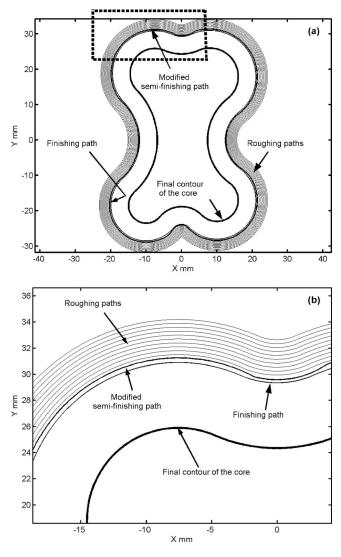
(a) Modified semi-finishing tool path generated by the proposed algorithm with optimized cutting engagement angle and (b) magnified view of the tool paths in the rectangular box
